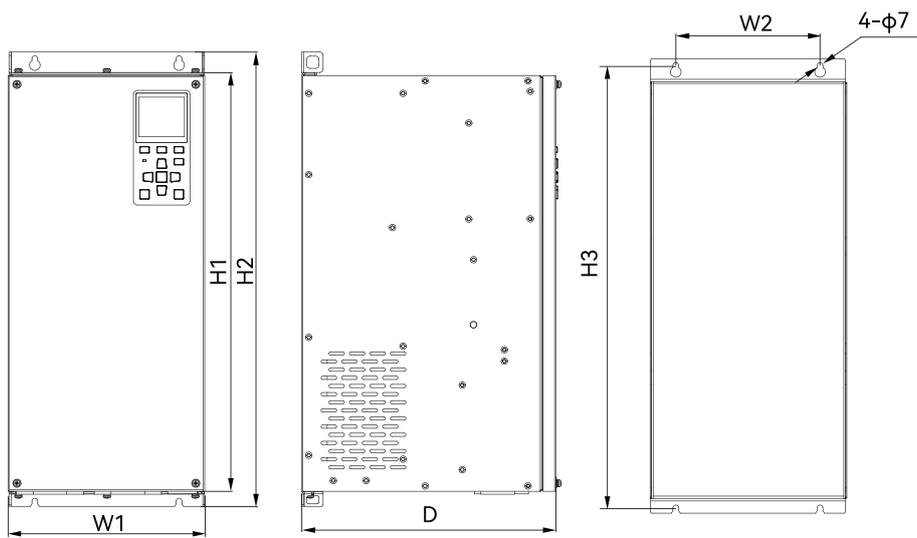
Dimensional drawing of E630 series products (55~75kW)
